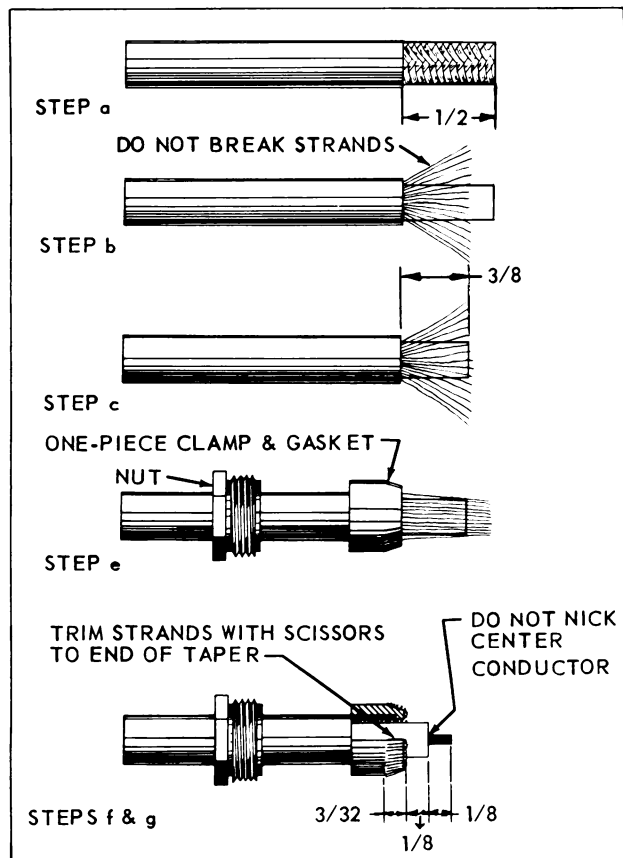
Attaching Modified Standard BNC Connectors to Coaxial Cable
